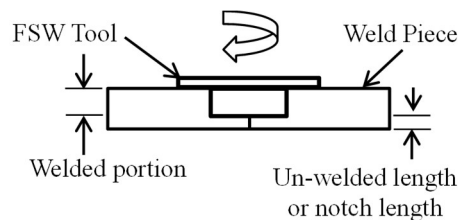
Un-welded portion close to the bottom of the weld piece
